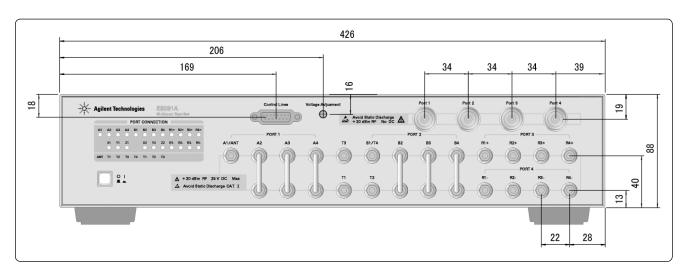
Dimensions (rear view, in millimeters, nominal)
